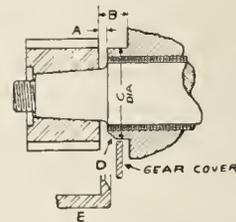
Diagram of Frame Head and Pinion showing Clearance for Pinion Puller Ring
